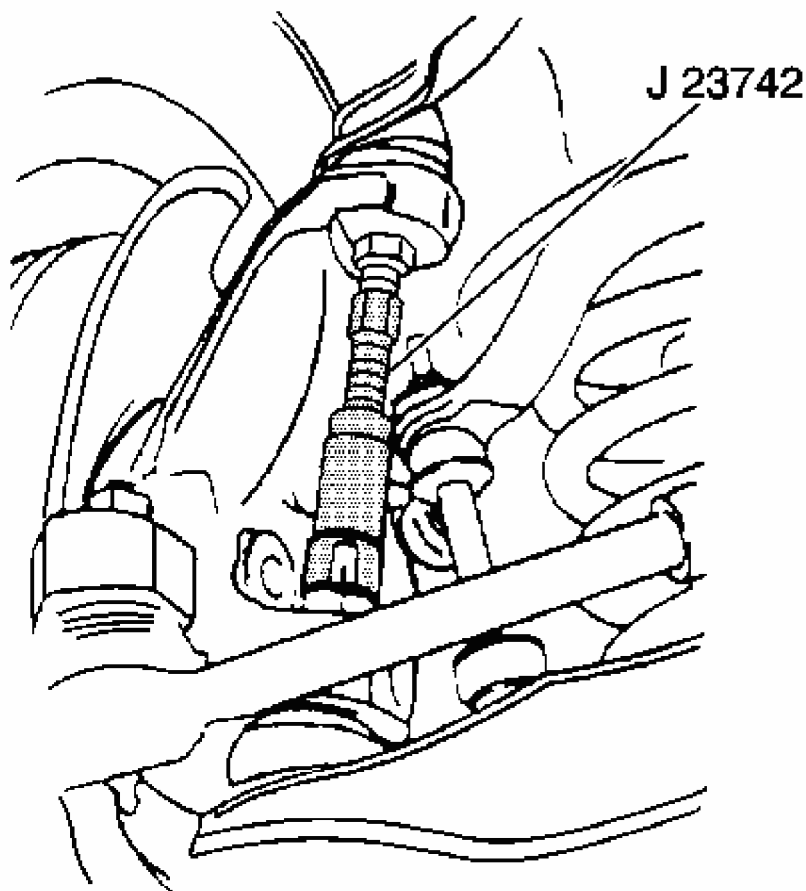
Remove The Upper Ball Joint Stud From The Steering Knuckle
